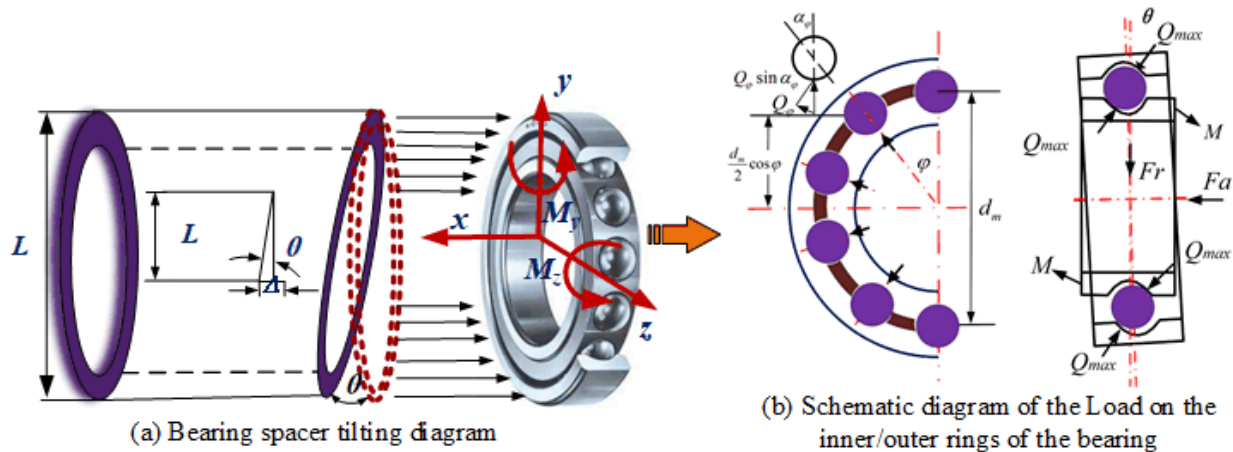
Diagram of the forces on the bearing assembly: (a) Bearing spacer tilting diagram, (b) Schematic diagram of the Load on the inner/outer rings of the bearing.
